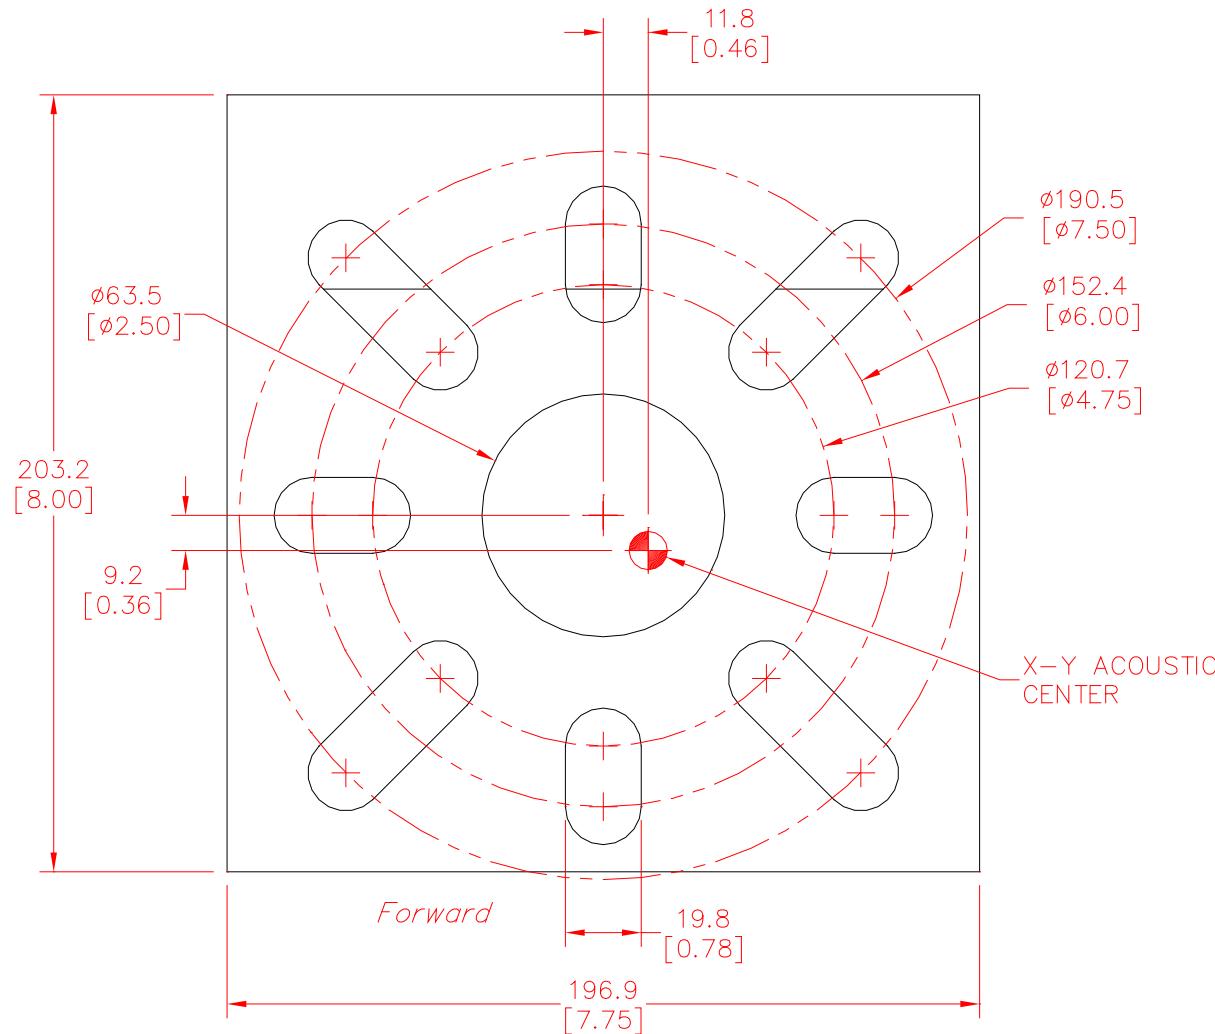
Sonic 2020 mounting frame, top view, flange attachment
